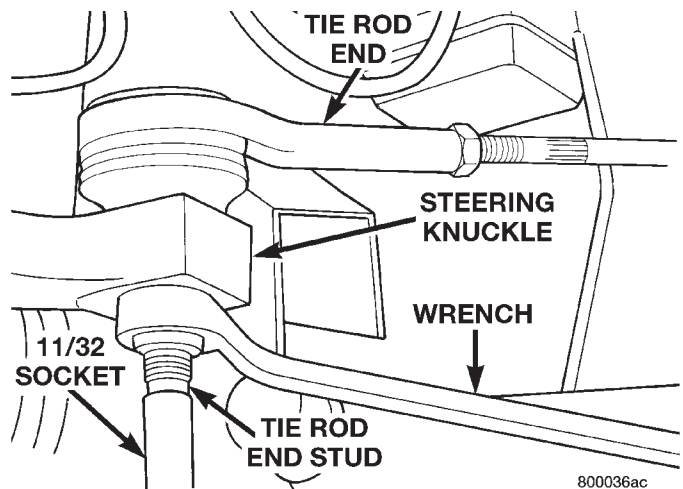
Removing/Installing Tie Rod End Attaching Nut
